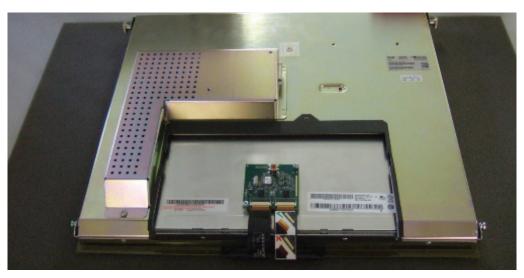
FLEXIBLE CABLES PLUGGED INTO THE CONTROLLER PCB
